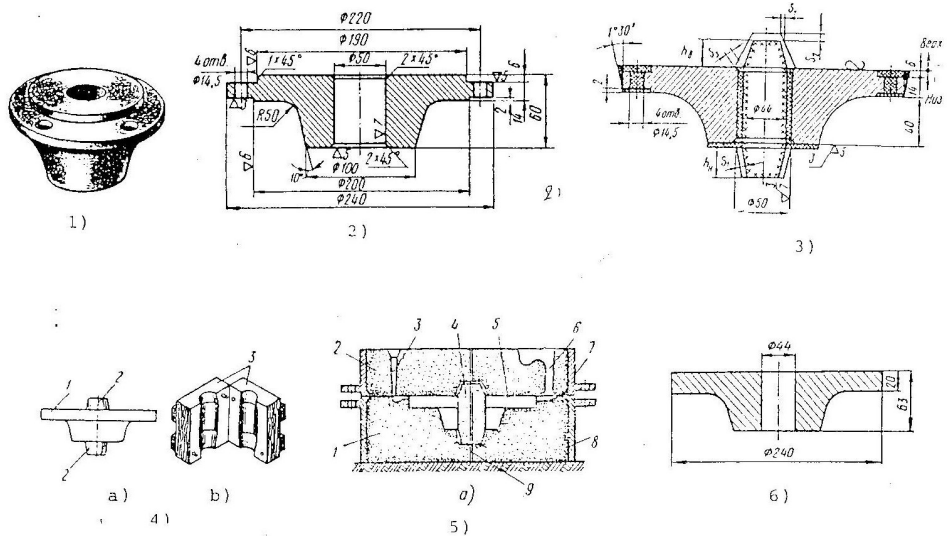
A simple casting that illustrates the principle of molding a pattern and withdrawing it from a sand mold
